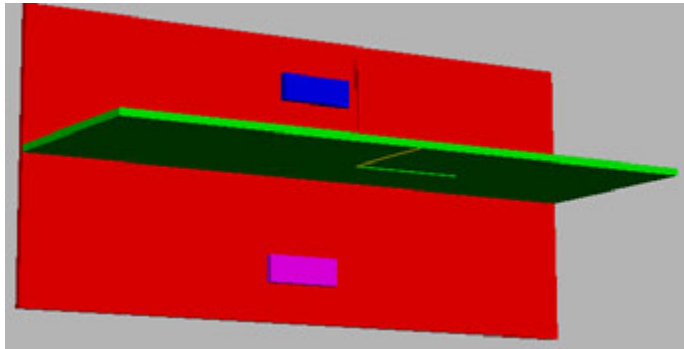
The clamping conditions are shown. The clamps were modeled to have the same dimensions as the vise holding the sample during welding.
